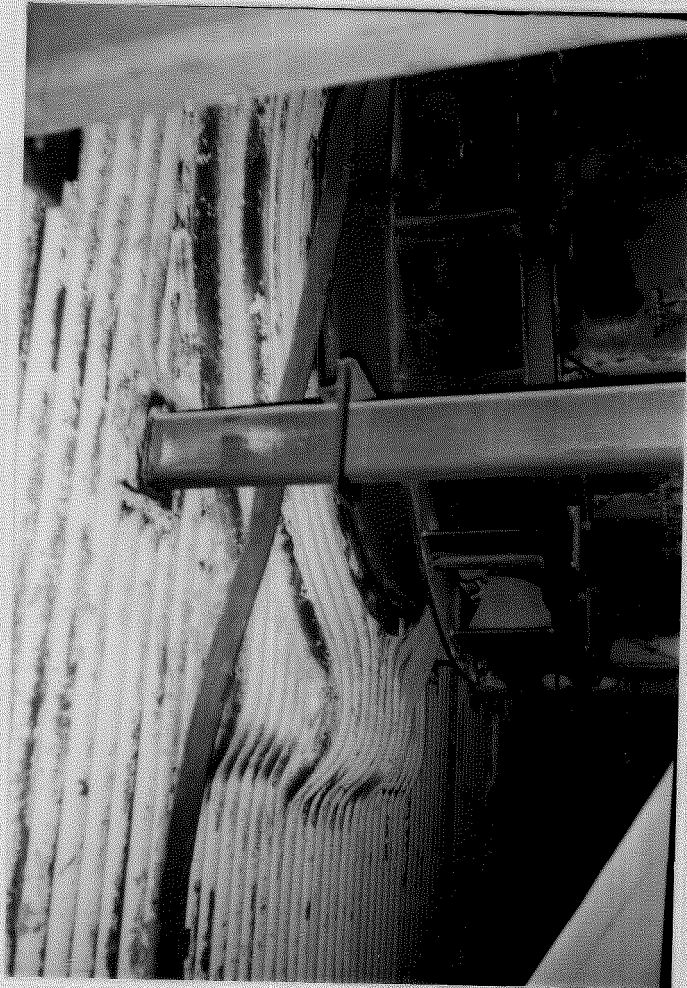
Throat sleeve casing ring failure on Burner 1C04
